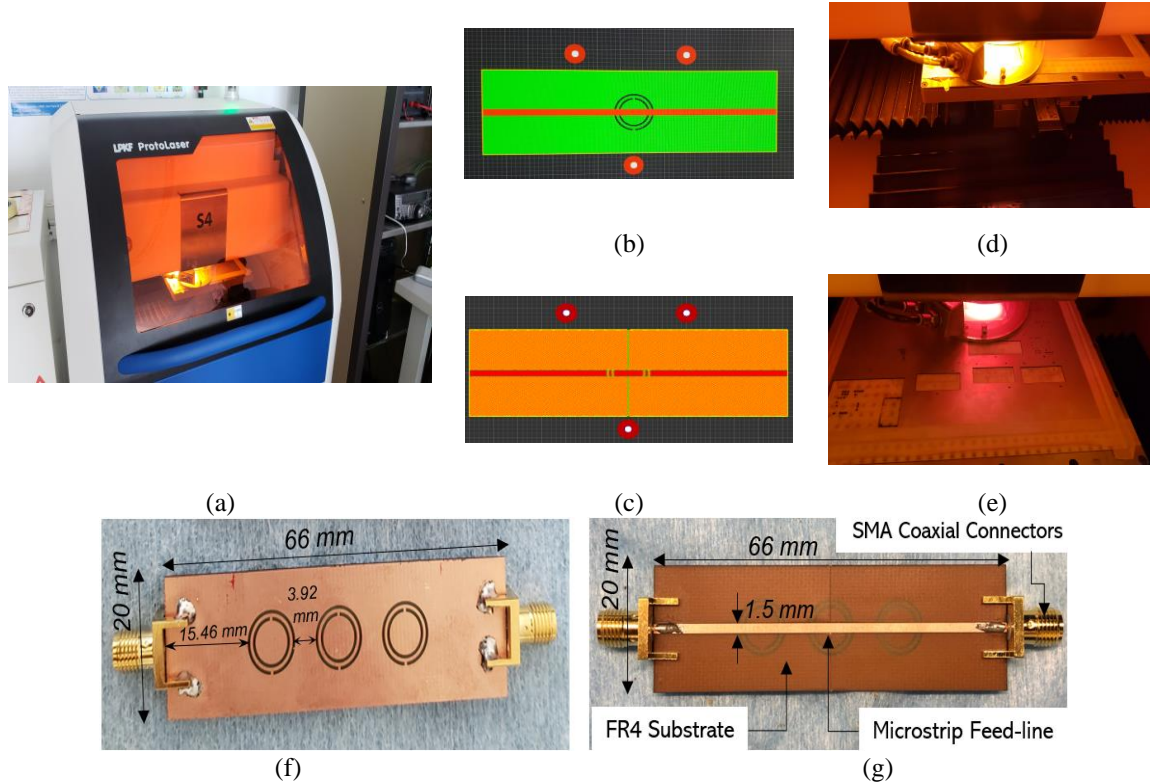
Fabrication process of the CSRR sensor prototypes using the laser technology (a) Proto-Laser machine, (b) Gerber file sample, (c) placing the fiducials, (d) engraving the CSRR poles on the ground plane, and (e) patterning the transmission line on the bottom side. Fabricated sensor prototype (f) top view showing the ground plane where the CSRR sensing elements are patterned, (g) bottom view showing the MTL used for exciting the CSRRs.
